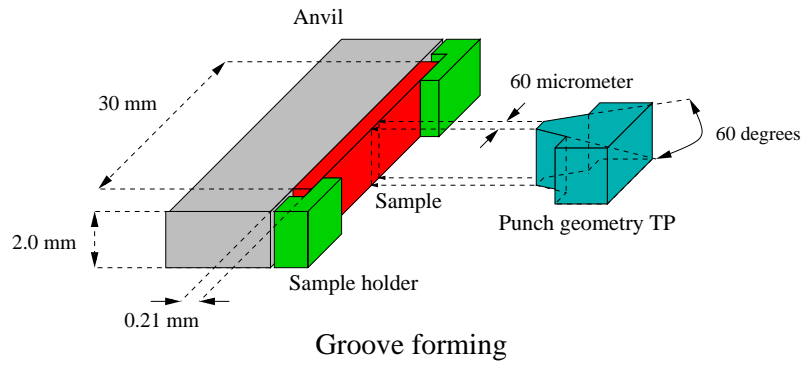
Groove forming setup and dimensions (courtesy of S.H.A. Boers).
